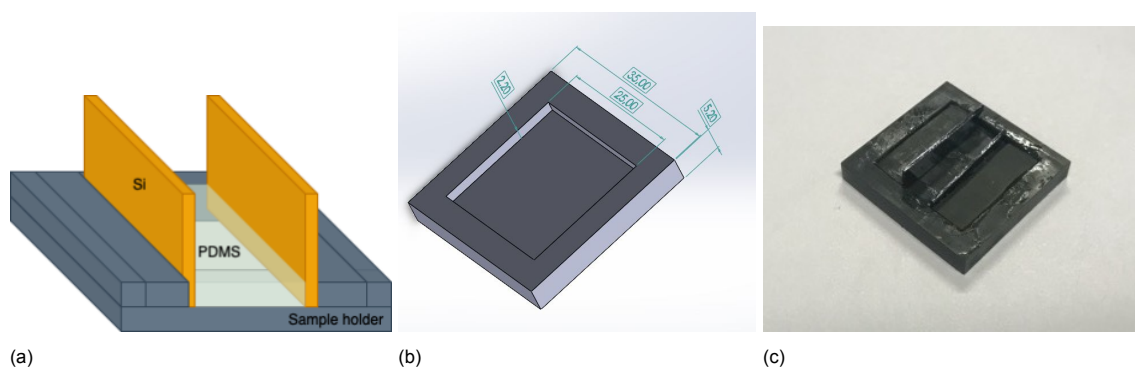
a) Illustration of the PDMS sample holder concept. b) CAD design of the sample holder with the dimensions labeled. c) Sample placed inside the sample holder in real life, with the silicon edged holder components placed on top.
